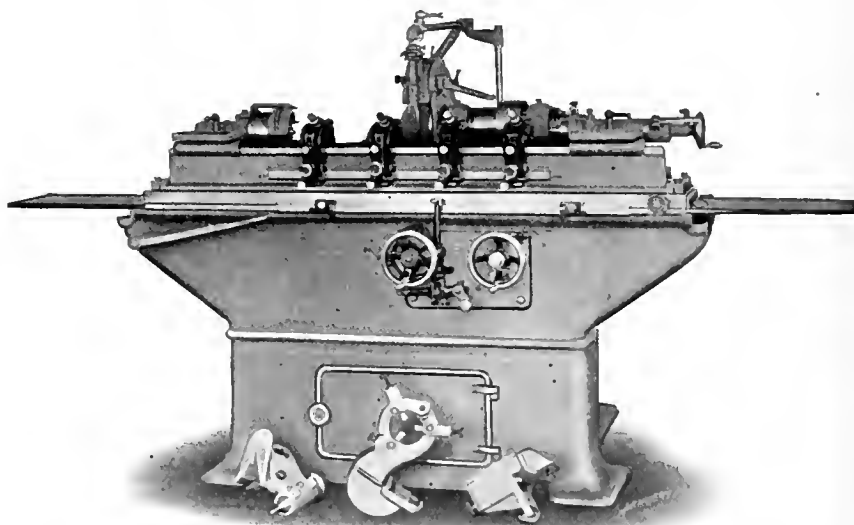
Brown & Sharpe No. 12 Plain Grinding Machine
